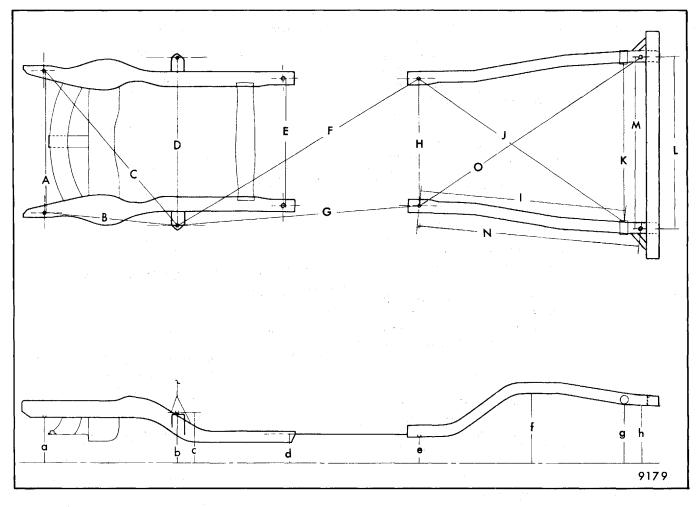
Horizontal and Vertical Checking Dimensions - X Styles
